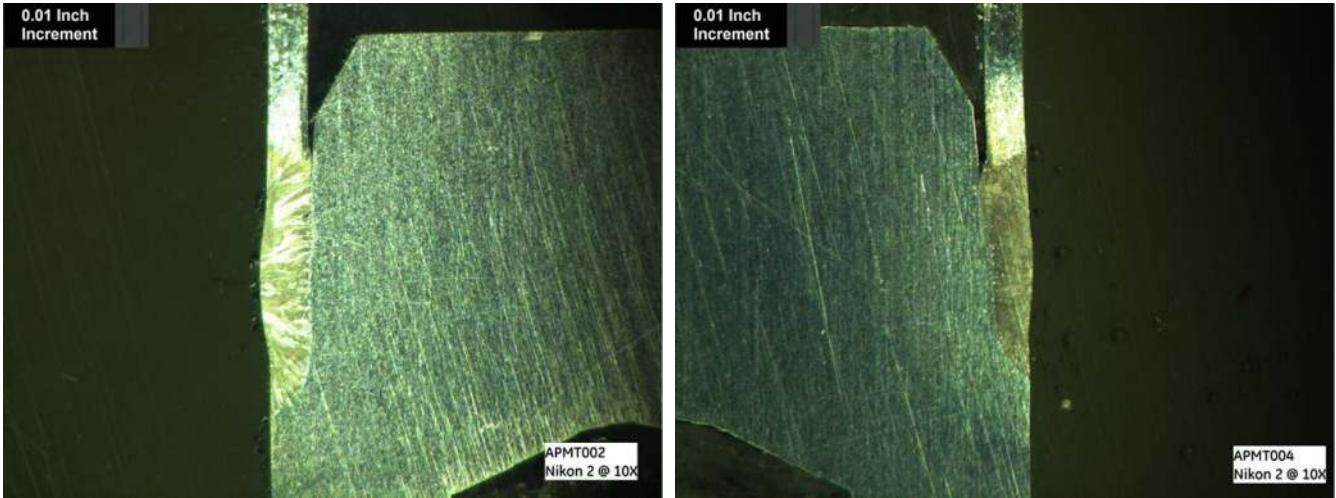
Thin walled tubes of APMT welded to APMT end caps using industrial production setting.
